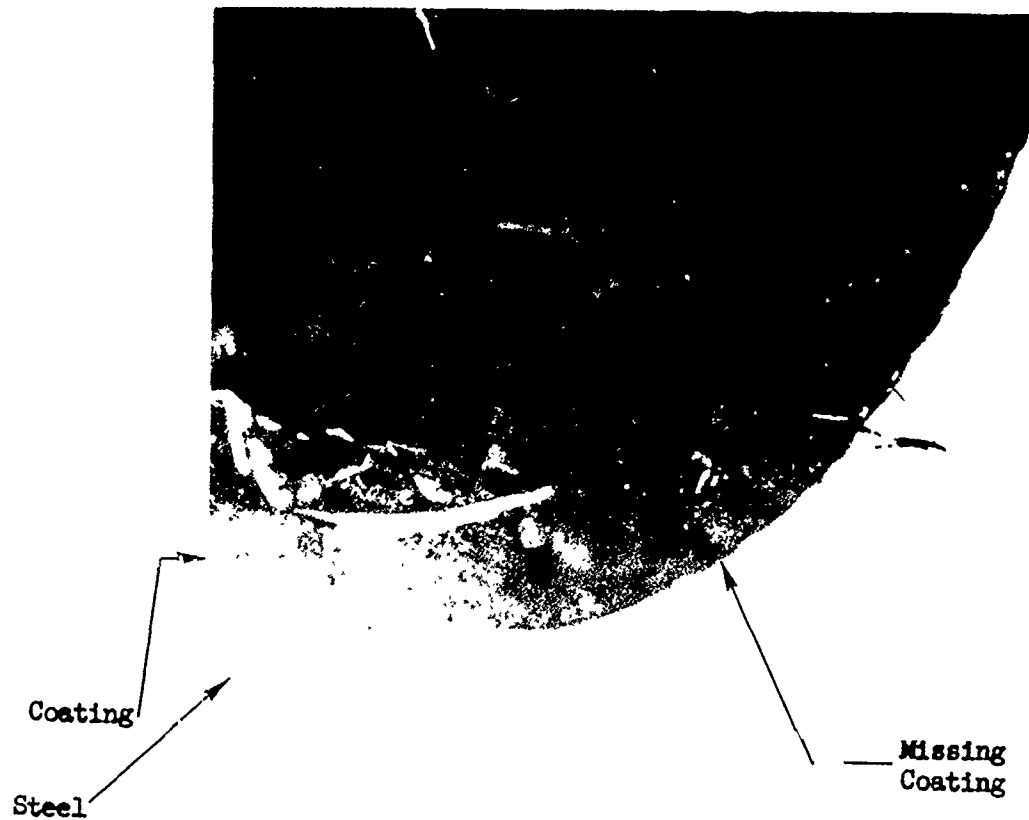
BOLT'S THREAD, MINOR DIAMETER COATED WITH SERMETEL W,
